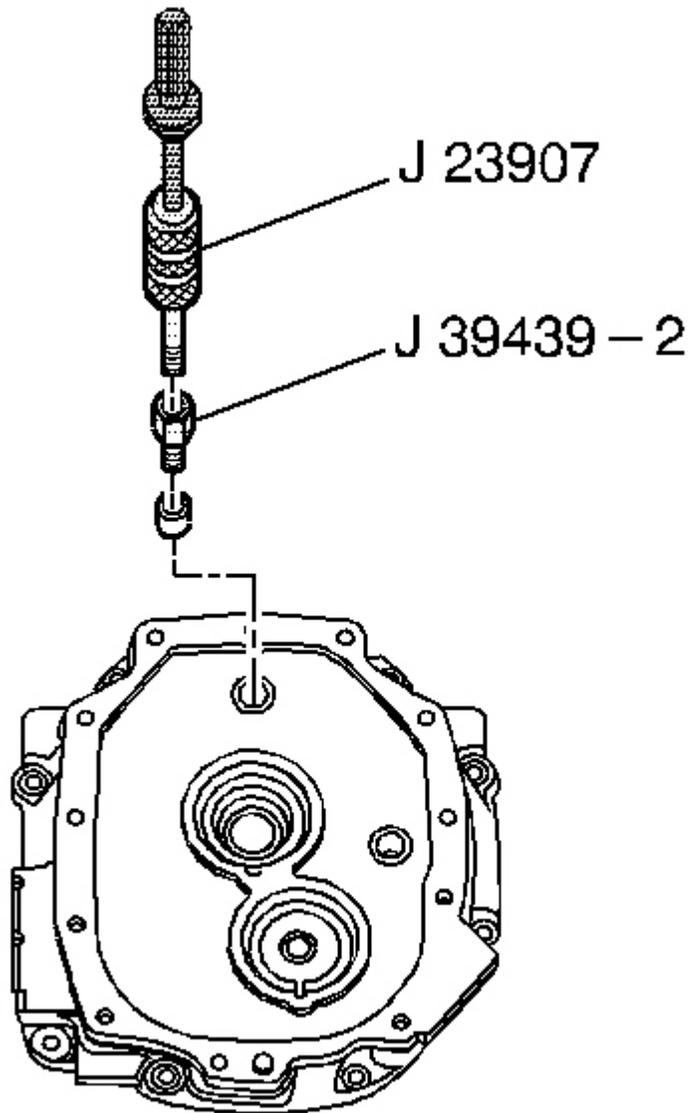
Removing 1st/2nd And The 3rd/4th Shift Shaft Bushing Using J 39439-2 & J 23907
